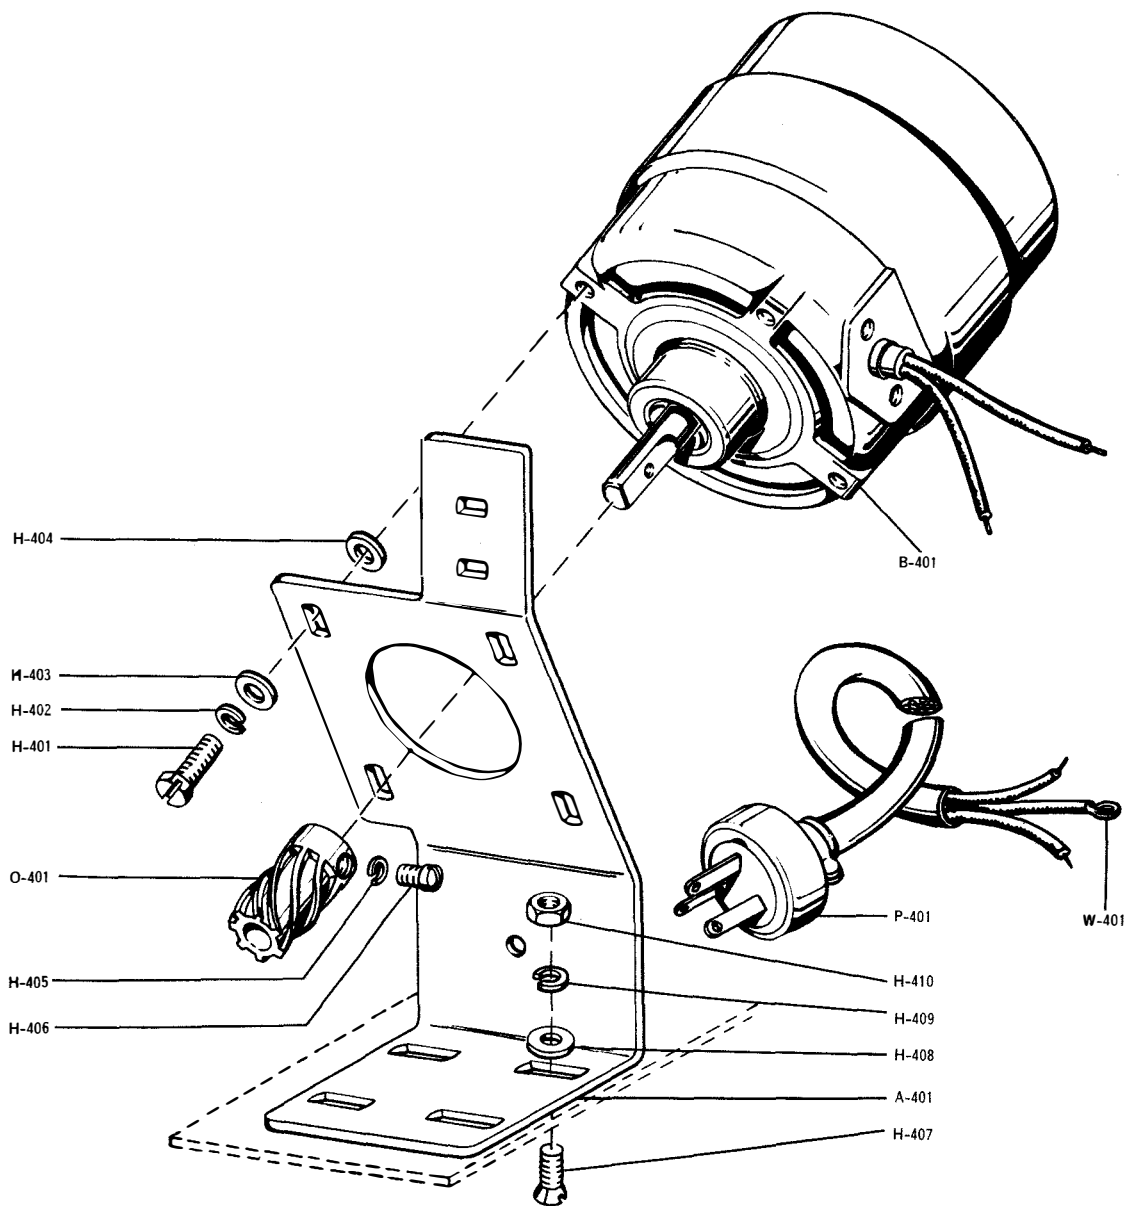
Reeling Machine RL-173/FGC, Motor Bracket Assembly
